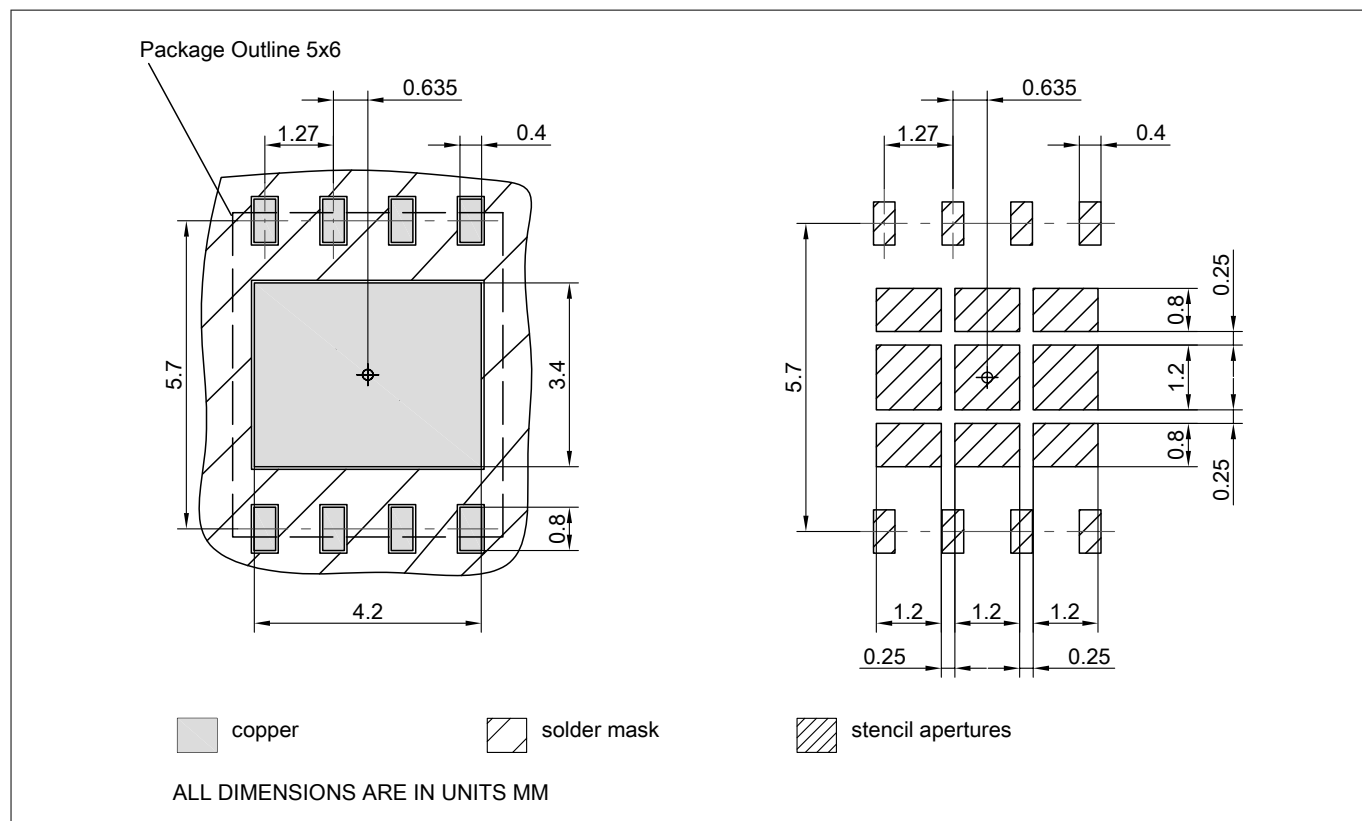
PG-VQFN-8-4, -6 package footprint
